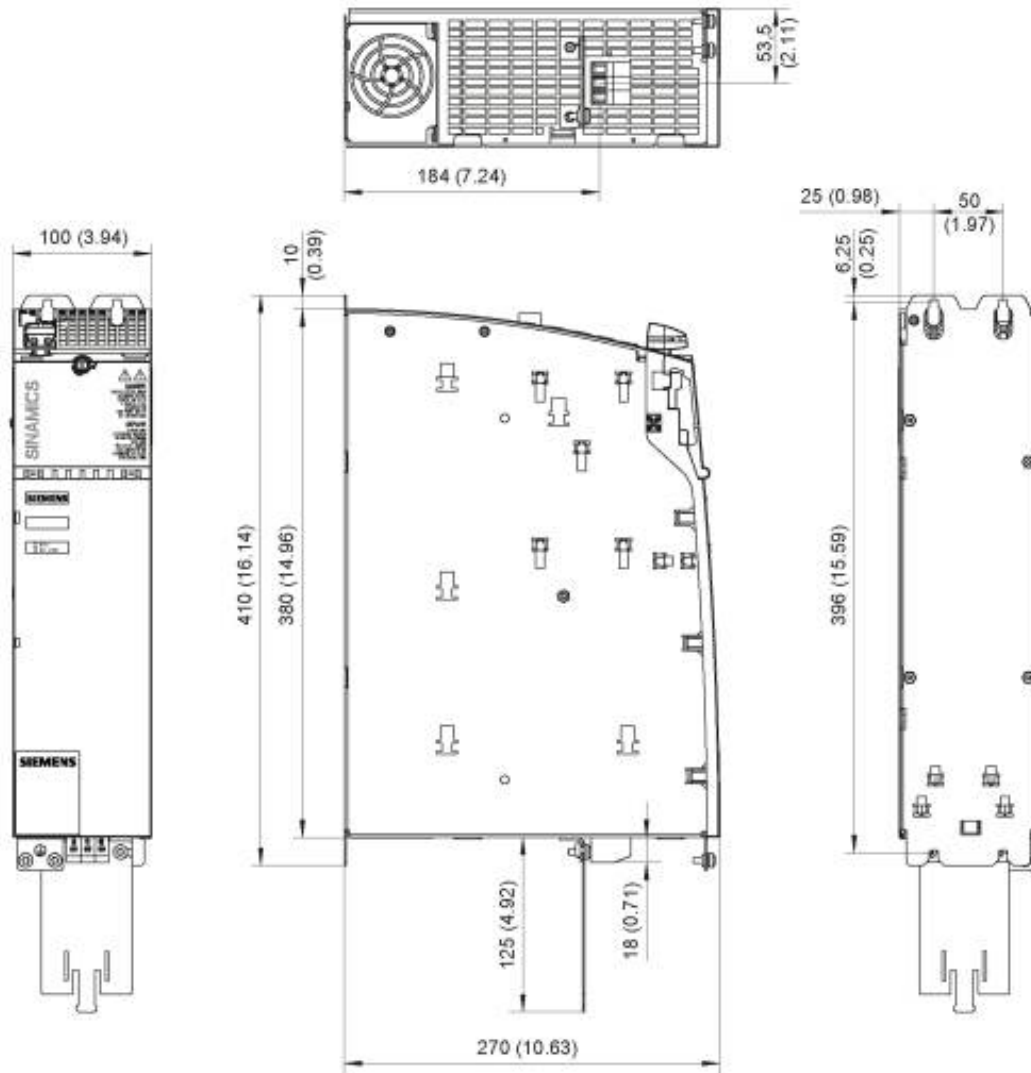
Dimension drawing of the 16 kW Active Line Module, all dimensions in mm and (inches)
